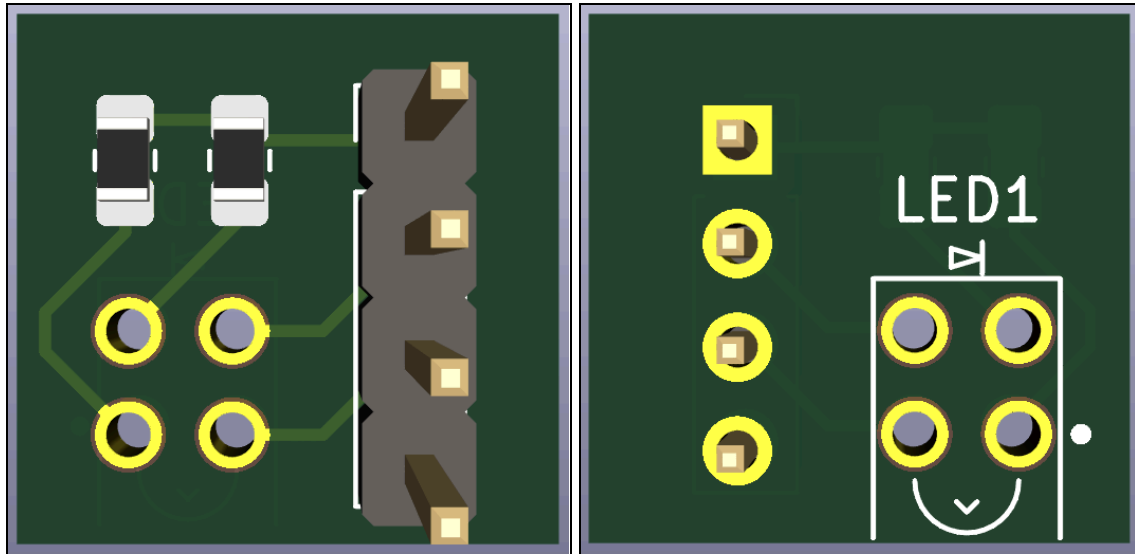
Keyboard PCB Layout*Figure 8. Keyboard PCB 3D View, Alternate Side
